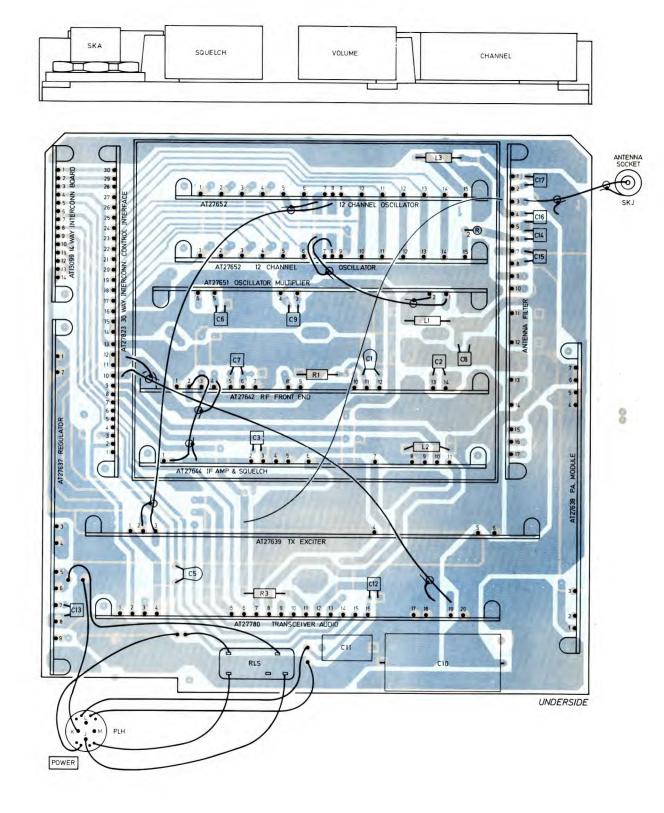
COMPLETE MOTHER BOARD LAYOUT
